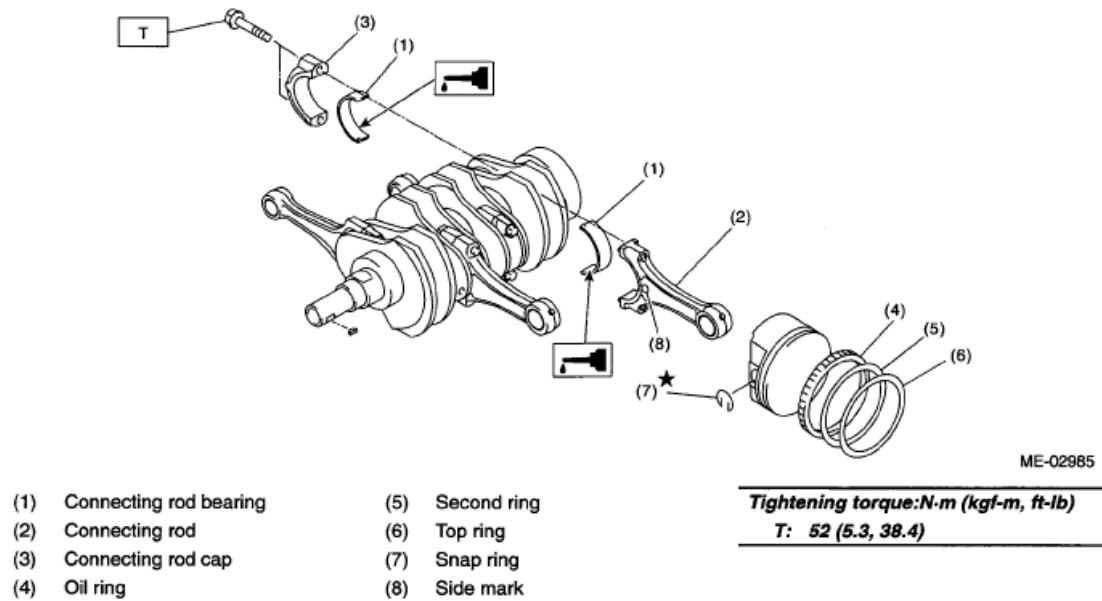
Identifying Connecting Rod Components With Torque Specifications
